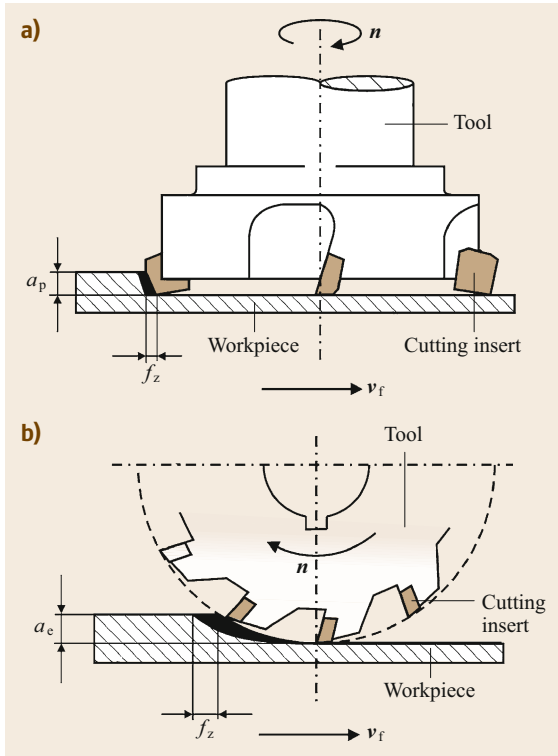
,b Comparison of face milling and peripheral milling. (a) Face milling: workpiece surface generated by minor cutting edge. (b) Peripheral milling: workpiece surface generated by major cutting edge
